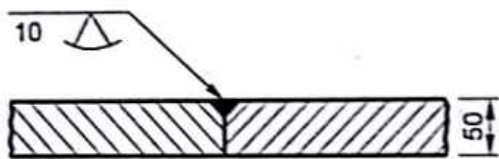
Partially penetrated butt-weld on one side
